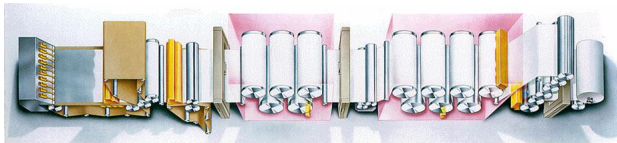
Schematic illustration of a paper machine. The direction of the paper production is from left to right. The dryer section, with its steam heated cylinders, is the pink area in the figure.
